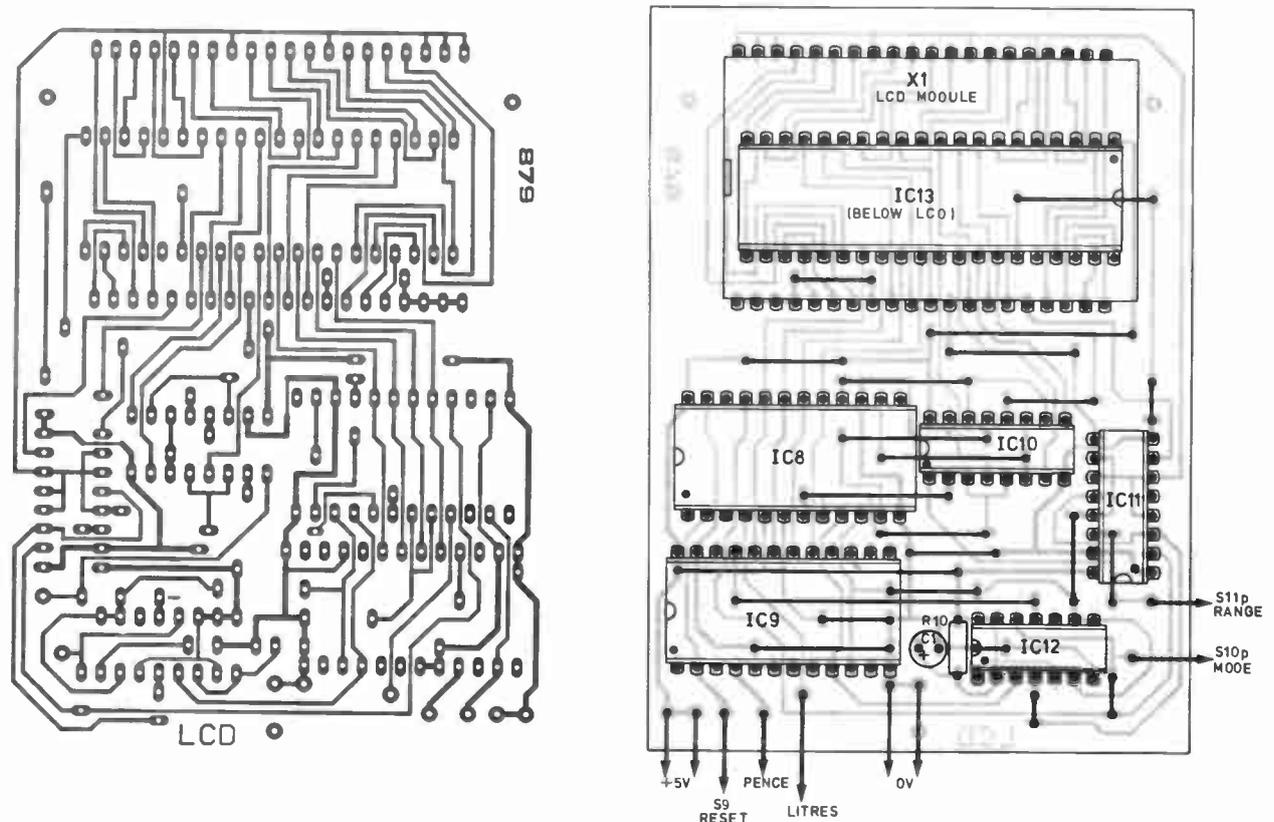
Topside component layout and full size copper foil master pattern for Counter/Display printed circuit board.
